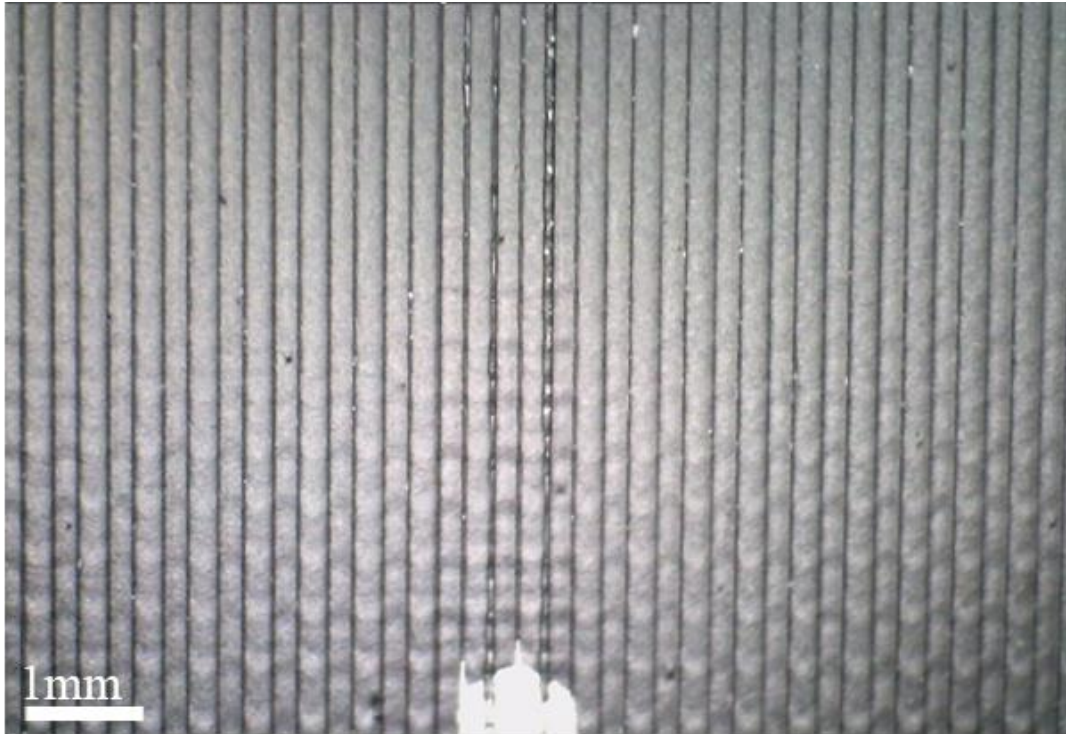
Optical image of the nScript 3D printed part showing an under extrusion between roads exposing the previous layer.
